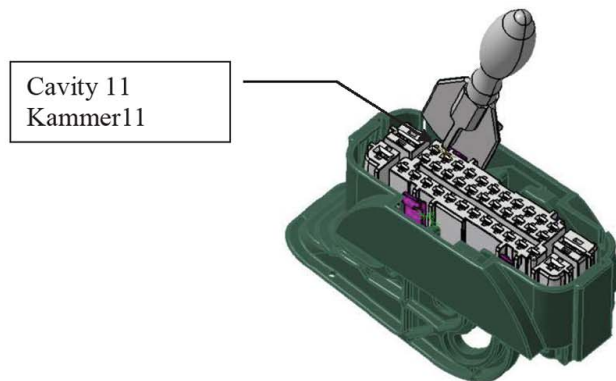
38-way connector, positioning the operating tool; the operating tool has to be manufactured according to the drawing Nr 1 928 H00 394., see figure 39
